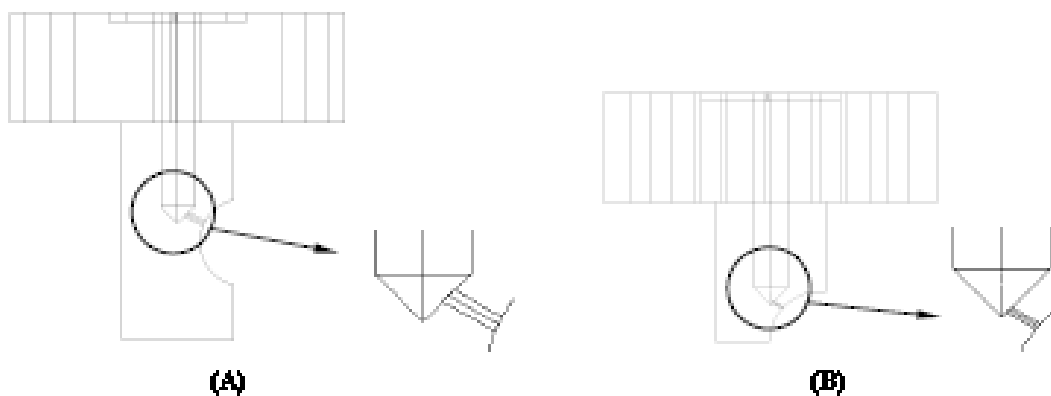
CAD Drawings of Nozzle A ($d=0.5$ mm) and Nozzle B ($d=0.2$ mm)
